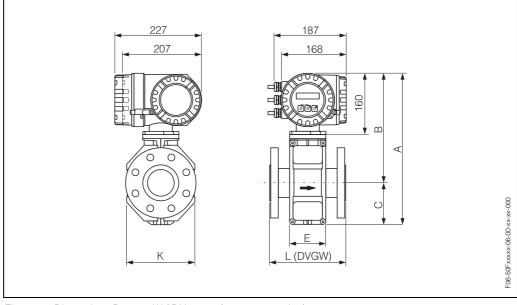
Dimensions Promag W / DN ≤ 300 (compact version)
